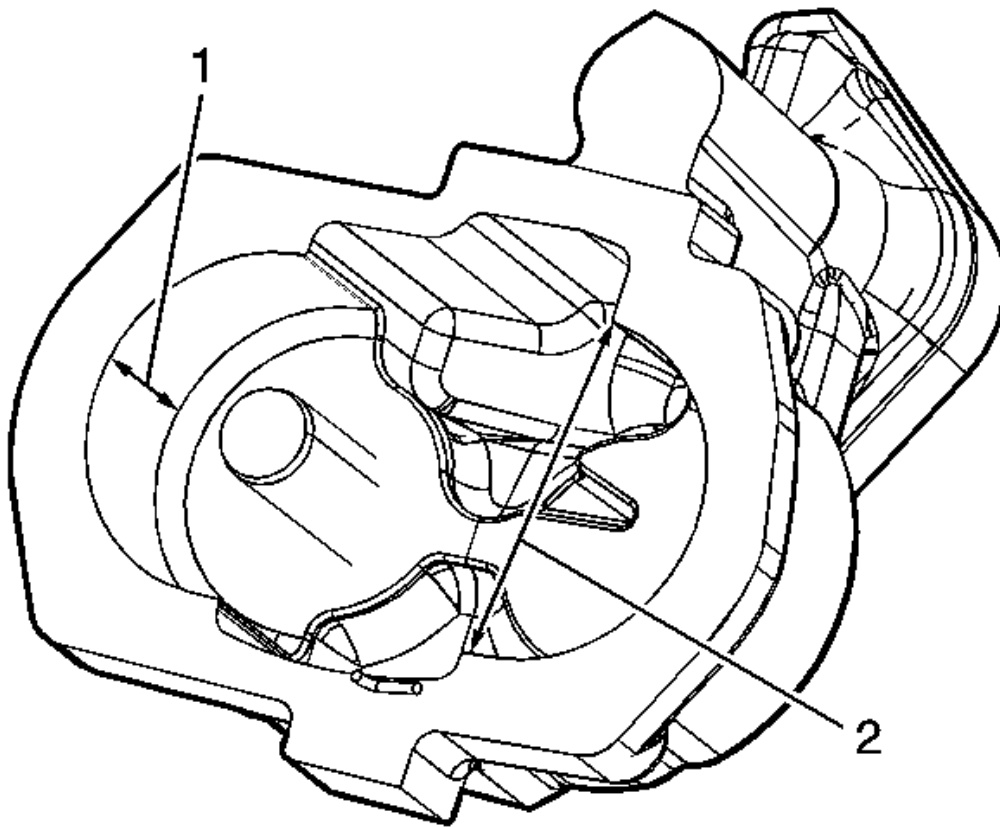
Measuring Oil Pump Housing Gear Pocket
